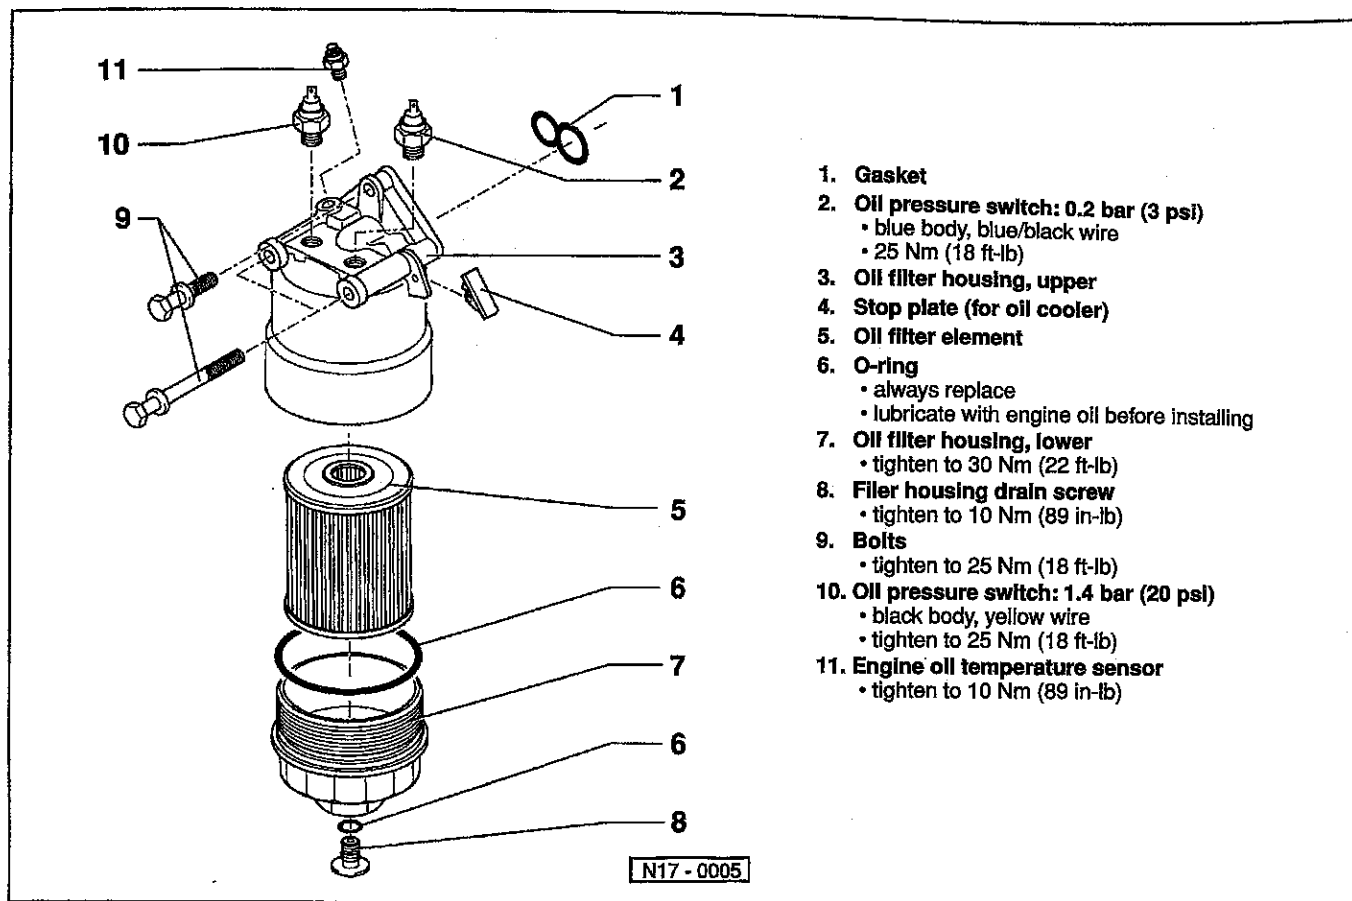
Exploded view of lubrication system on 2.8 liter, VR6 engine.
